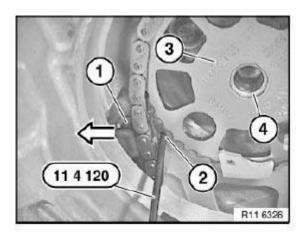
Identifying Special Tool (11 4 120) In Bore Courtesy of BMW OF NORTH AMERICA, INC.
